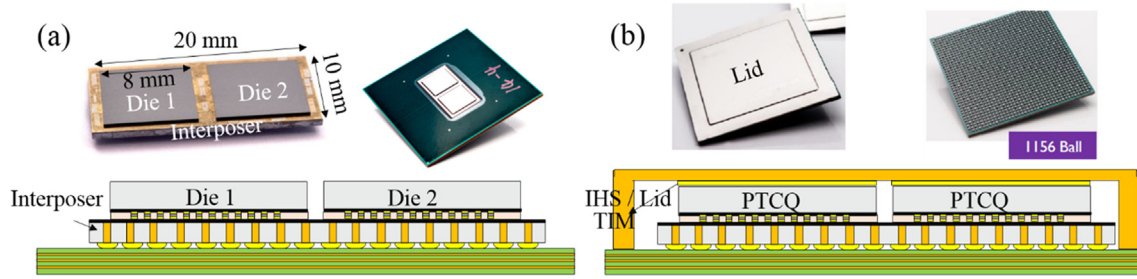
Bare die package and lidded package: (a) two thermal test chips on Si interposer without lid; (b) thermal test chips on Si interposer with lid.
